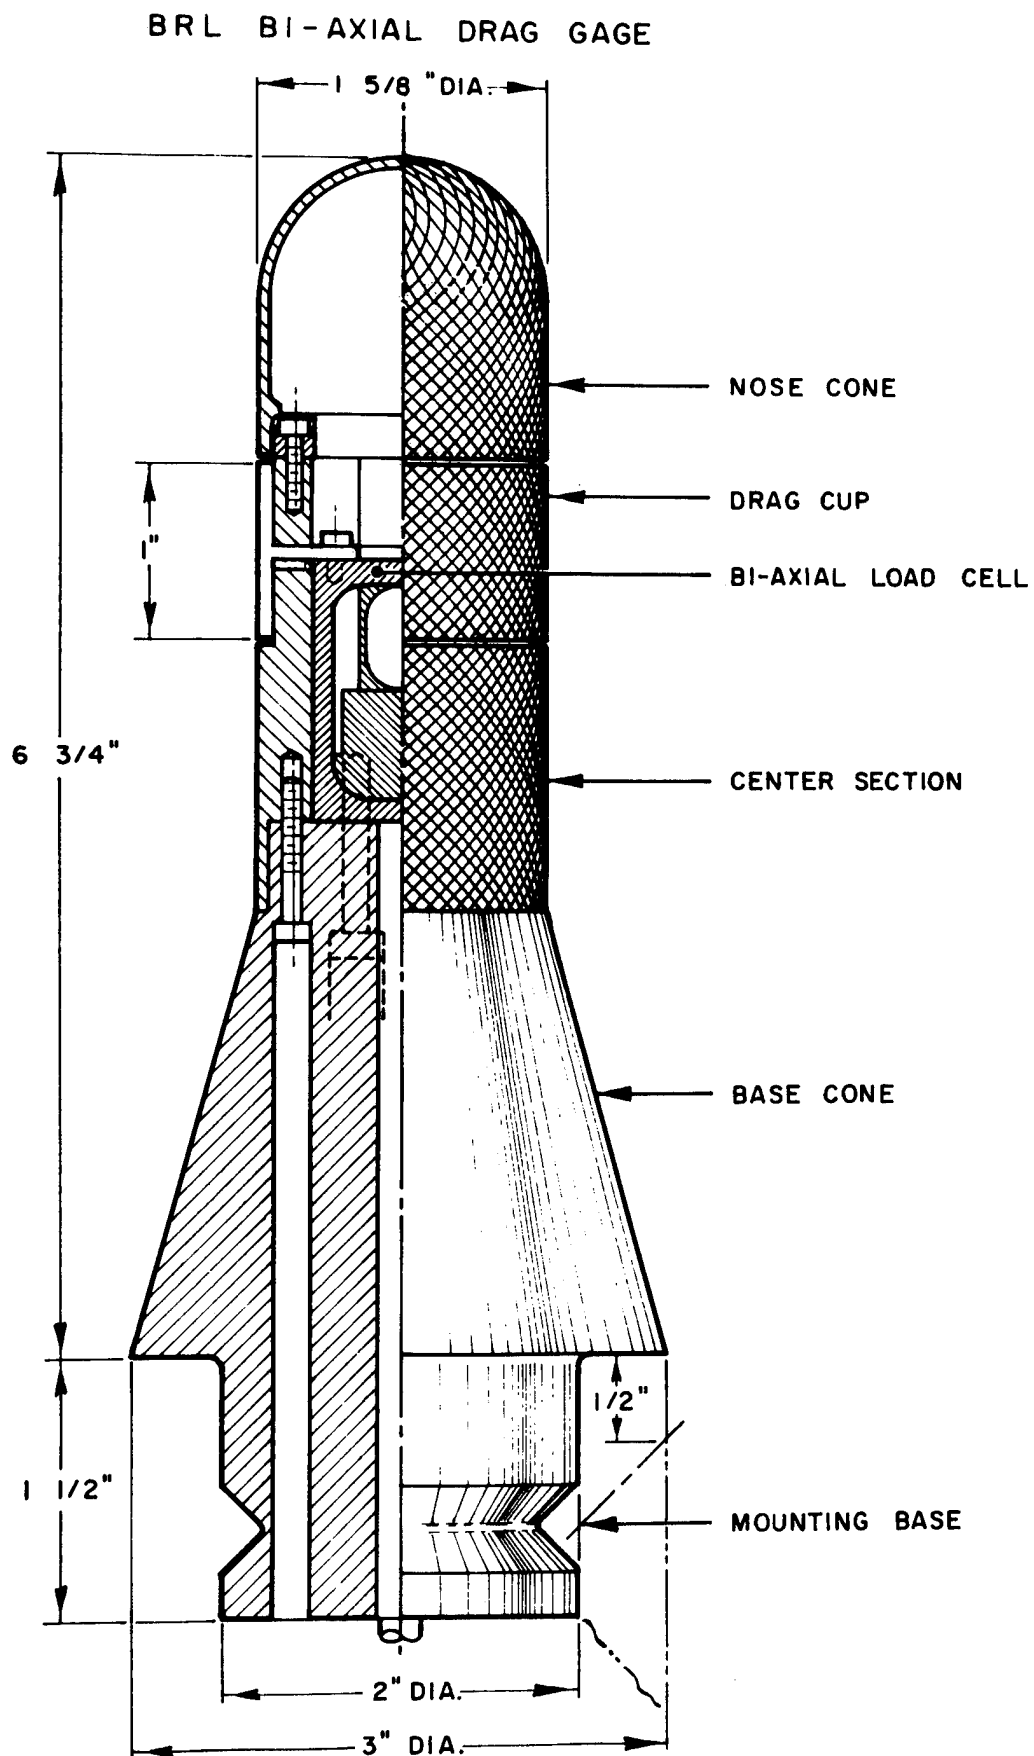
Assembly drawing of BRL bi-axial drag gage.
